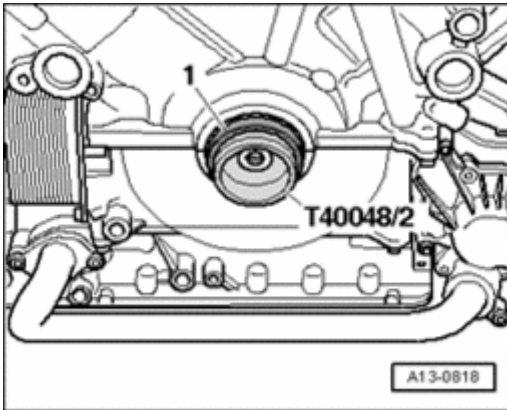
Placing Pull Sleeve T40048/2 On Crankshaft And Sliding Seal Into Sealing Surface On Engine
